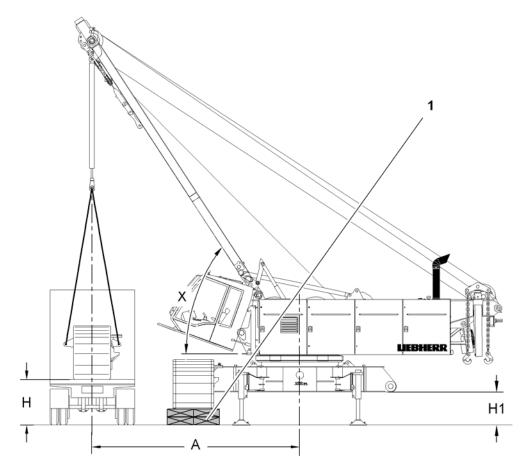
Limit values - unloading and fitting the second crawler side frame where space is limited
